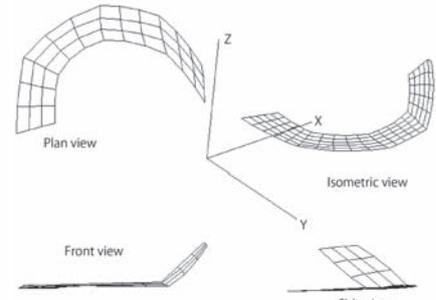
Three-dimensional surface developed for Japanese C-type blade
